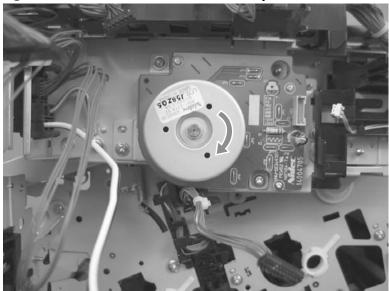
Remove the fuser drive assembly (7 of 7)
